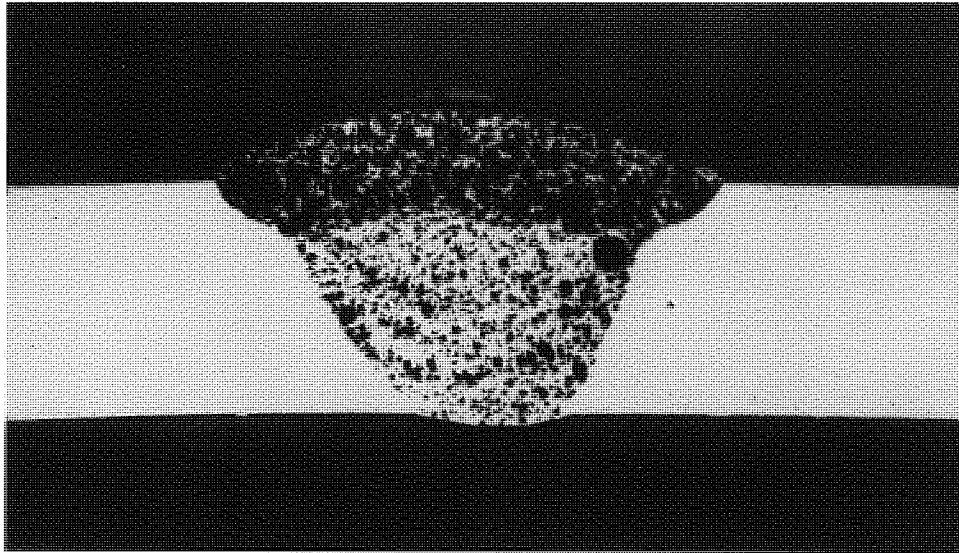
Porosity in O.F.H.C. copper weld metal
